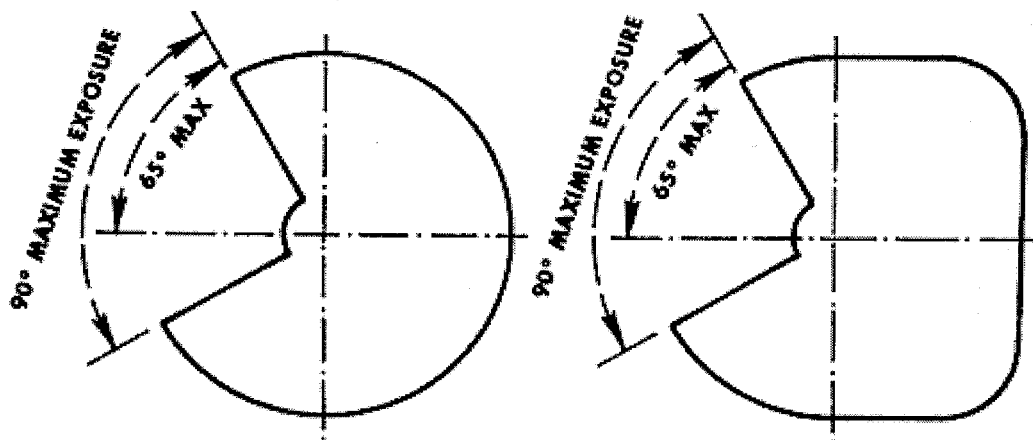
Bench and Floor Stand Grinder Guard Exposure Angles When Contact Below the Horizontal Plane of the Spindle is Required.
